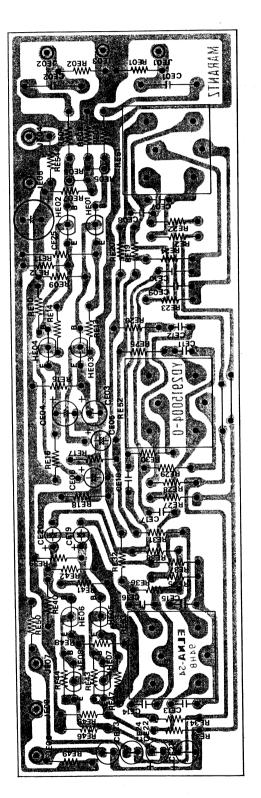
Pre-Tone Amplifier Assembly PE01 Component Locations
